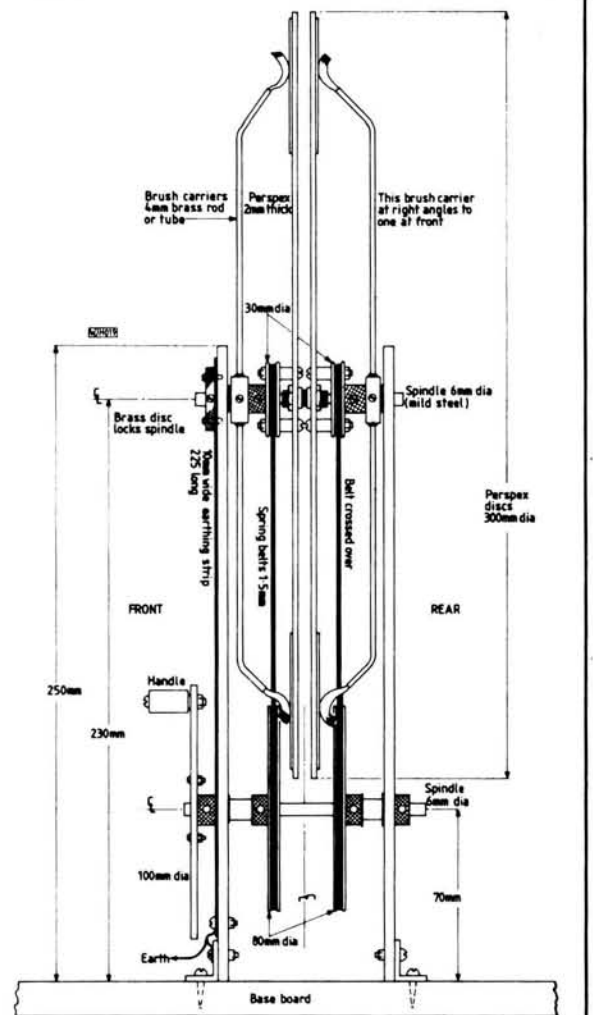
The side view showing the assembly of the discs, supports, drive pulleys, brush supports and brushes
